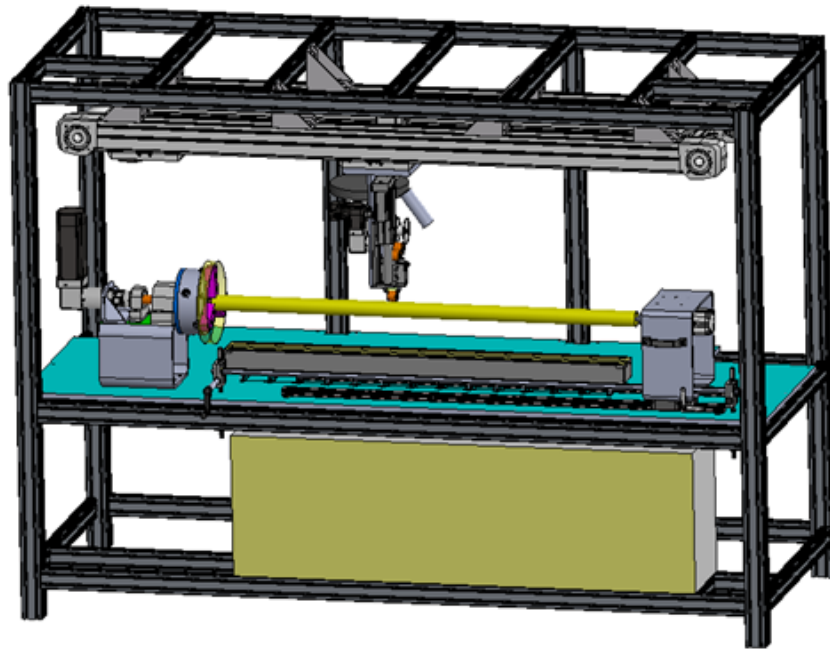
3D model of the tape winding test bench for thermoplastic composite manufacturing with IR heating.
